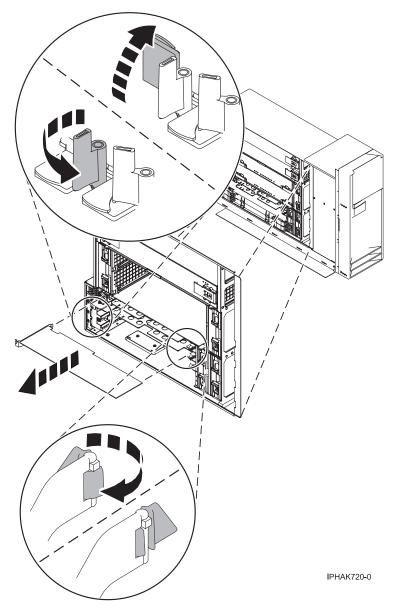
PCI adapter or filler plate removed from the stand-alone unit
